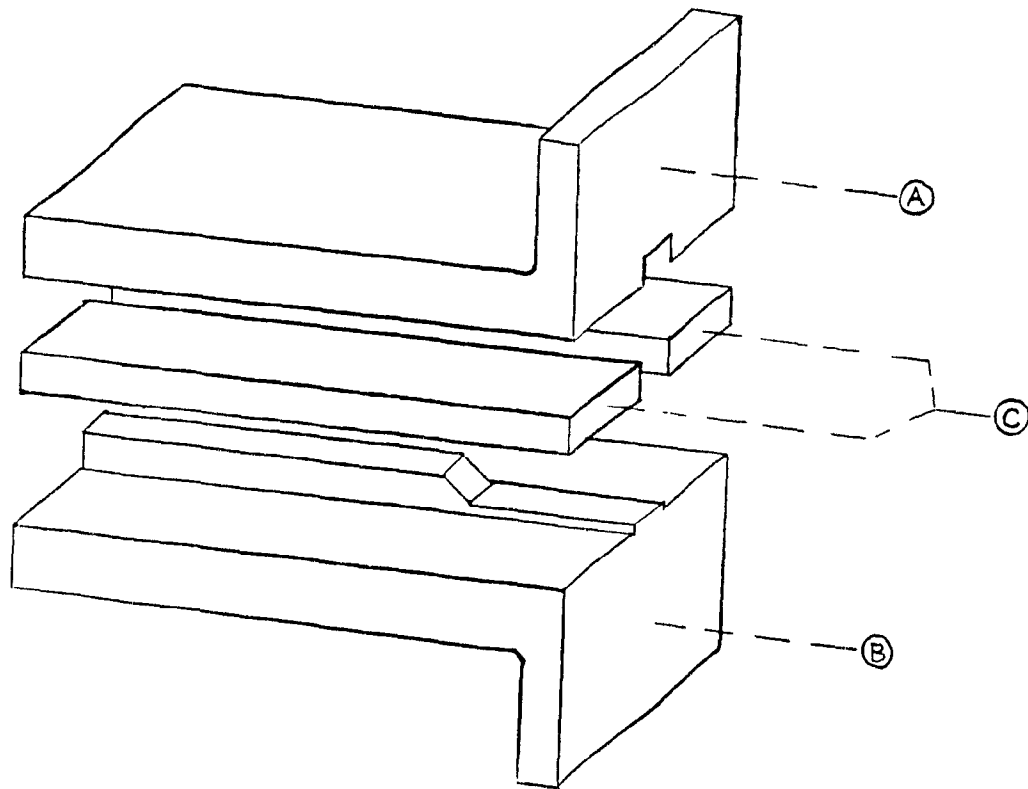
Exploded Schematic Assembly of Slit Die
